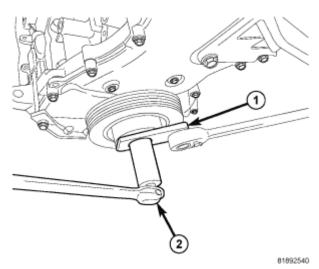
DAMPER REMOVAL Courtesy of CHRYSLER LLC
